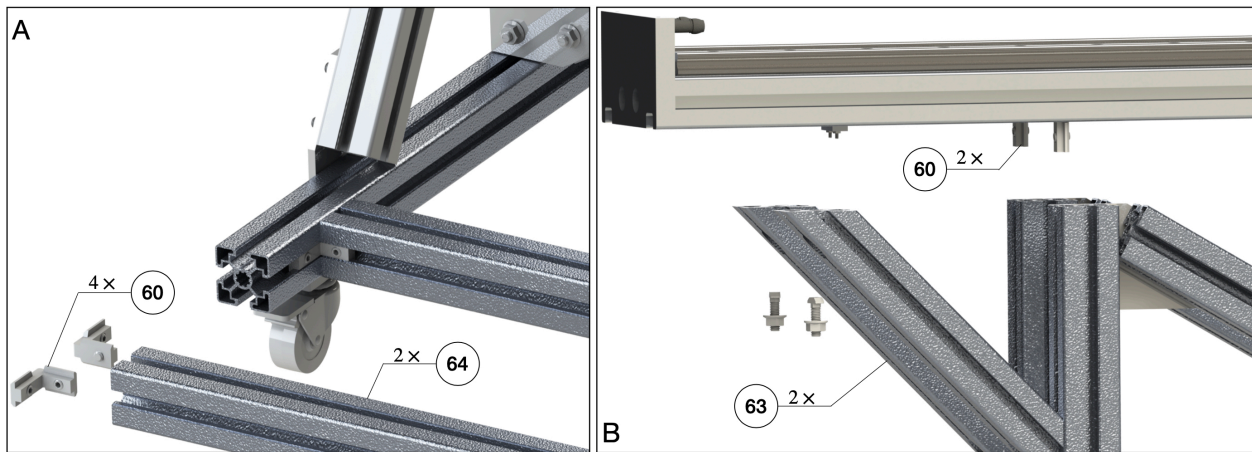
Assembly process of the system frame (A) and linear motor (B).
